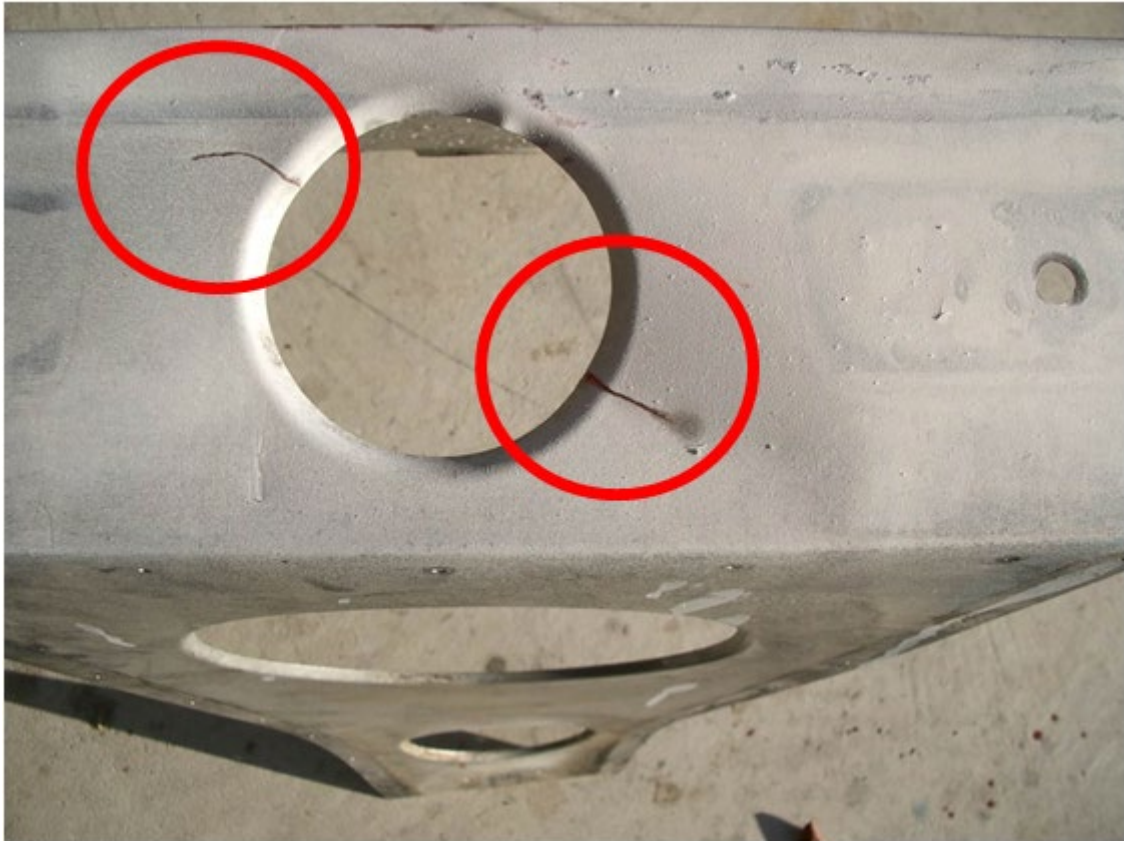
Cessna 172 Horizontal Stabilizer Front Spar Cracking
